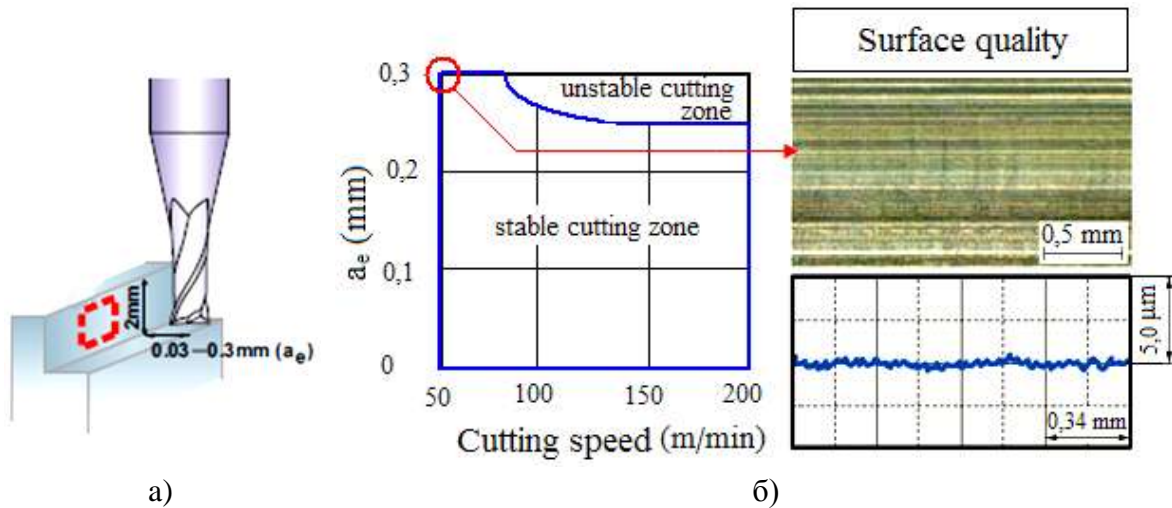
Area of stable cutting with face milling with a VF2MVD0200 mill [5]
